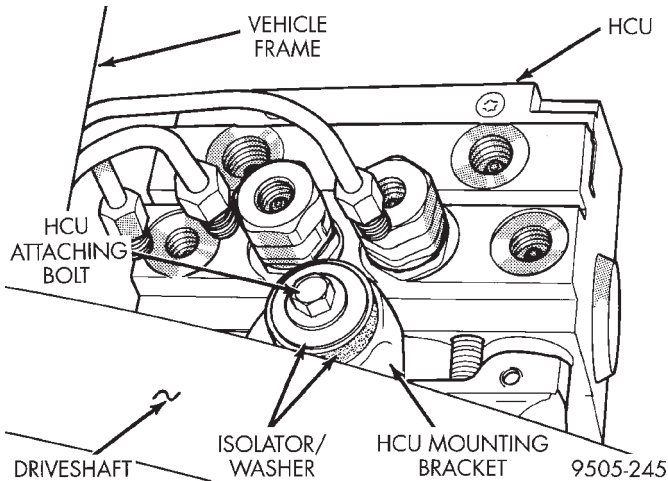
Front Attachment Of HCU To Mounting Bracket
